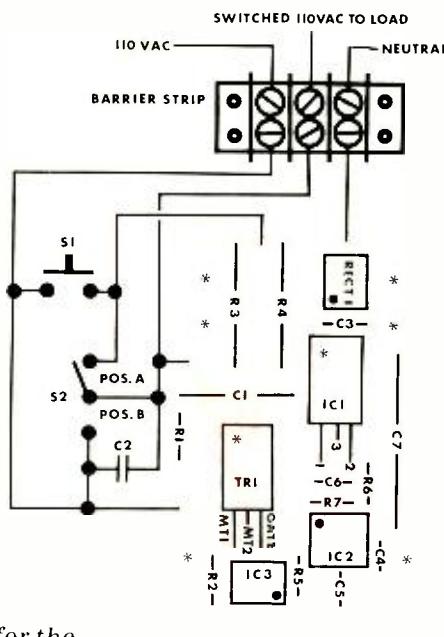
Parts placement guide for the printed circuit board is shown at right.
